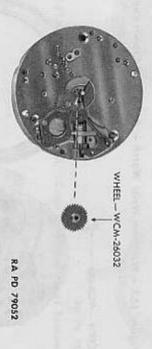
Waltham Wrist Watch - Hour Wheel Removed
